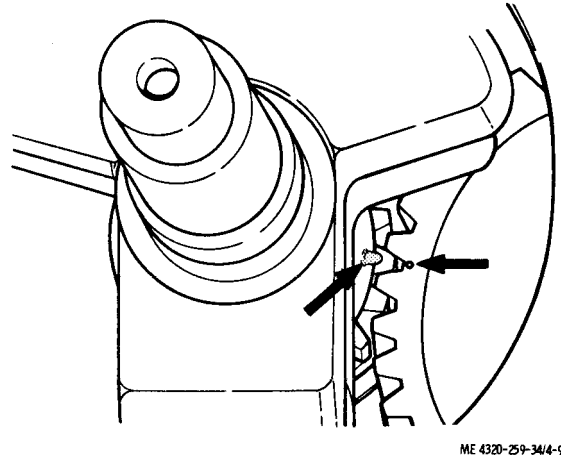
Crankshaft gear to camshaft gear timing marks.
